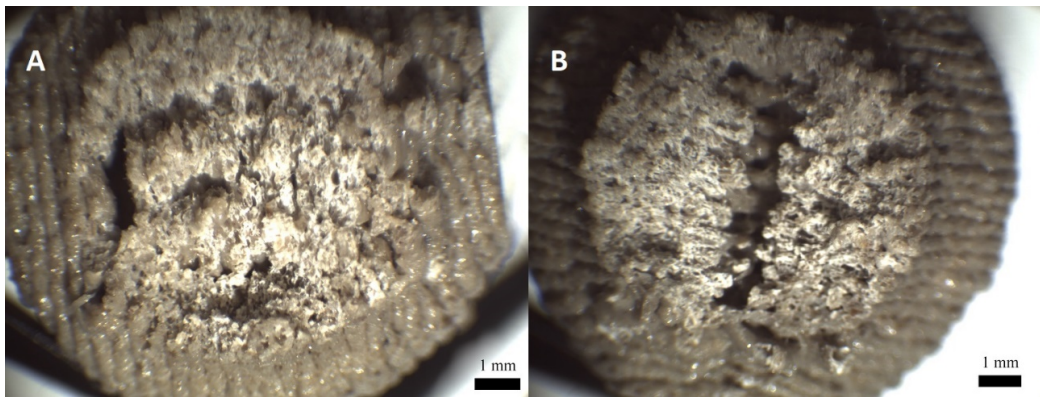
Fractographies of Timberfill specimens printed at 75% with infill pattern. A) Rectilinear. B) Honeycomb.
